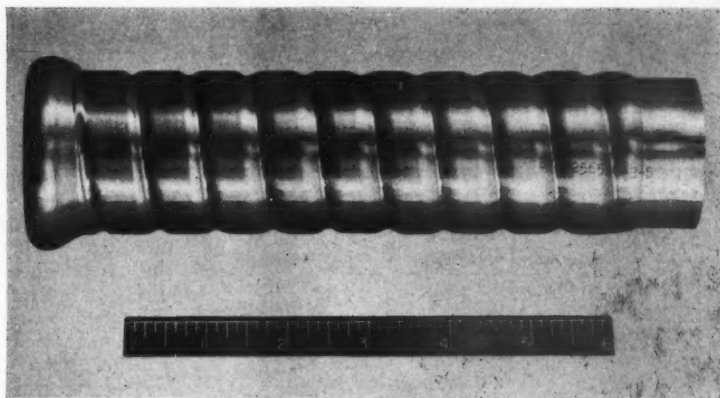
Rocket-engine thrust chambers have been explosively formed within diameter tolerances as close as 0.002 in. for small, and 0.010 in. for larger sizes
